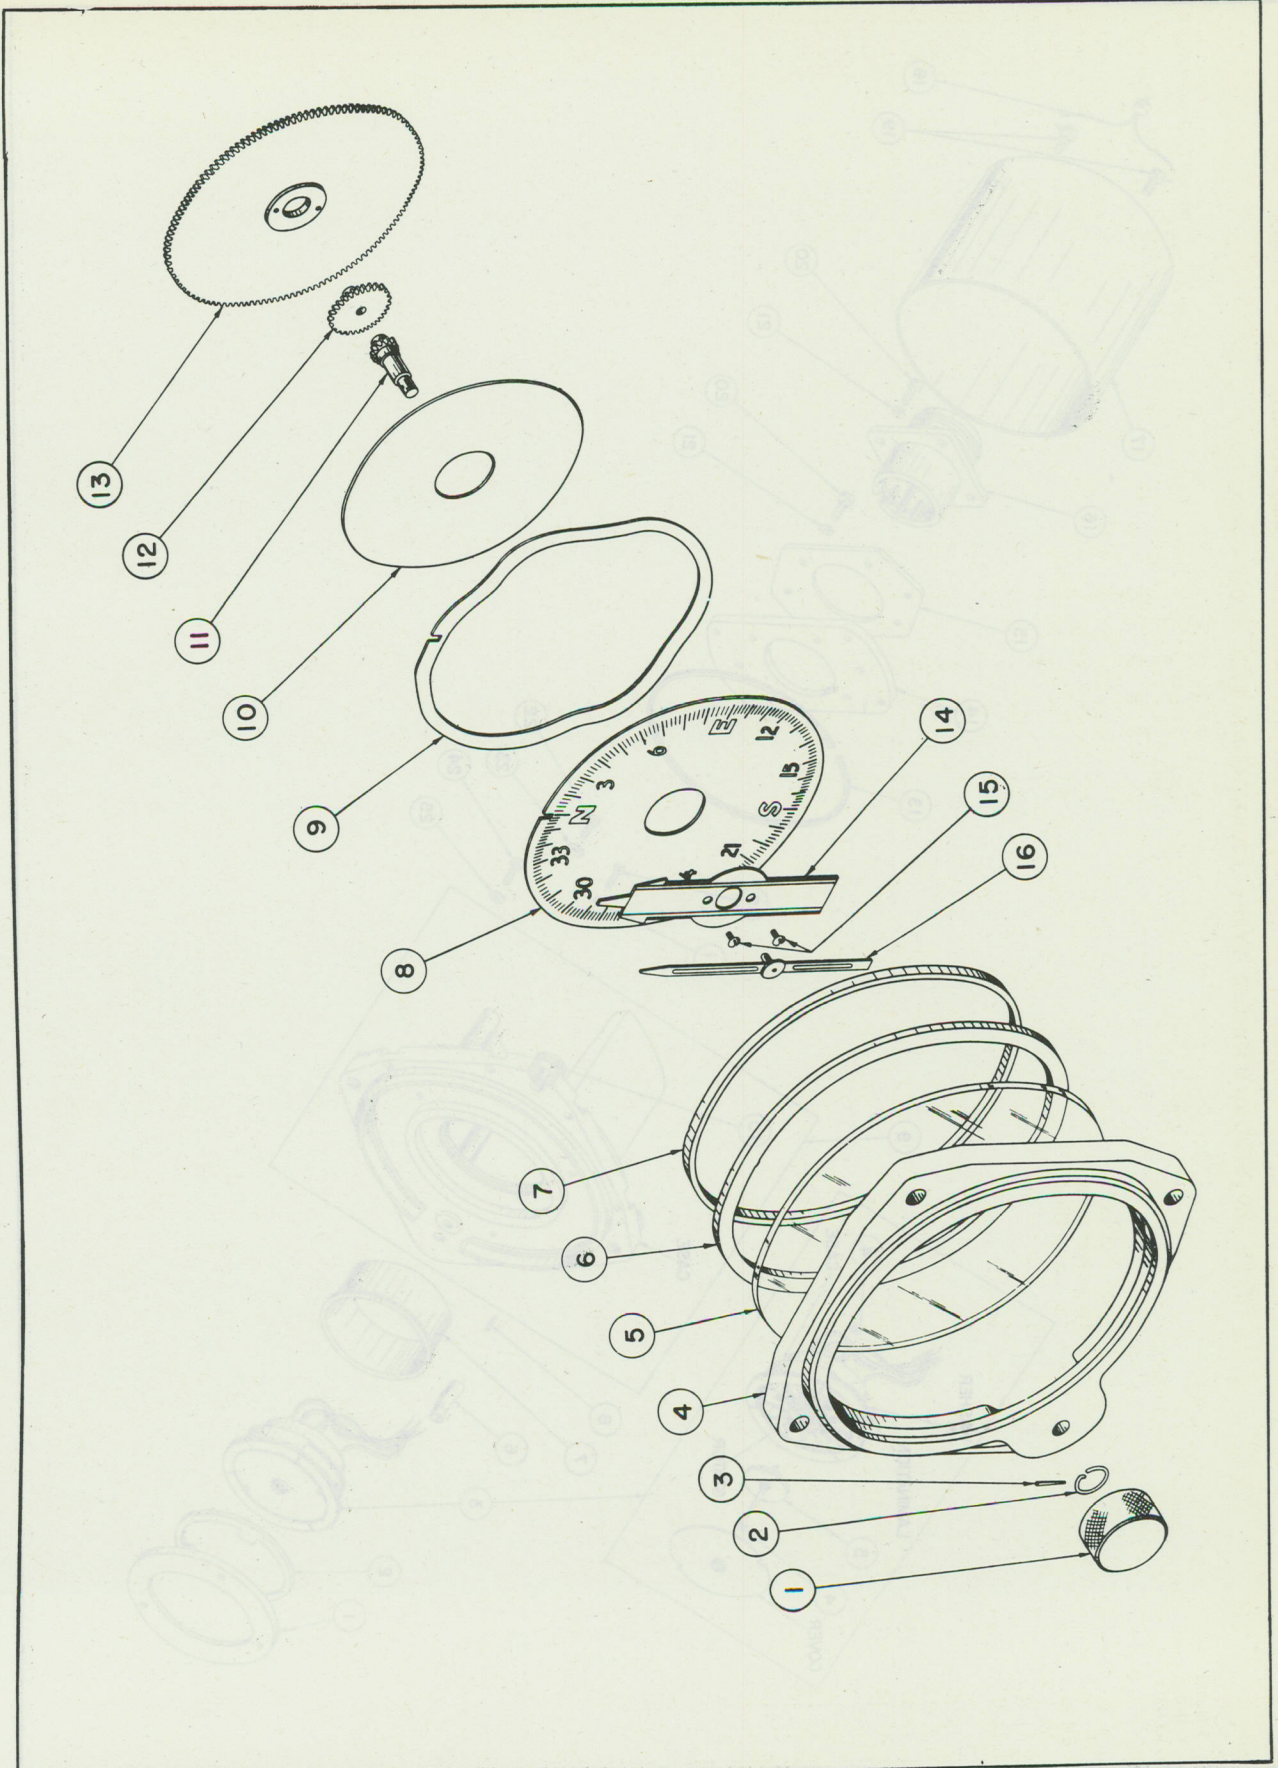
Exploded View Drawing—Main Assembly—Indicator—Types AN 5730-2 and AN 5730-6 (Pioneer Types 10061--A1)
